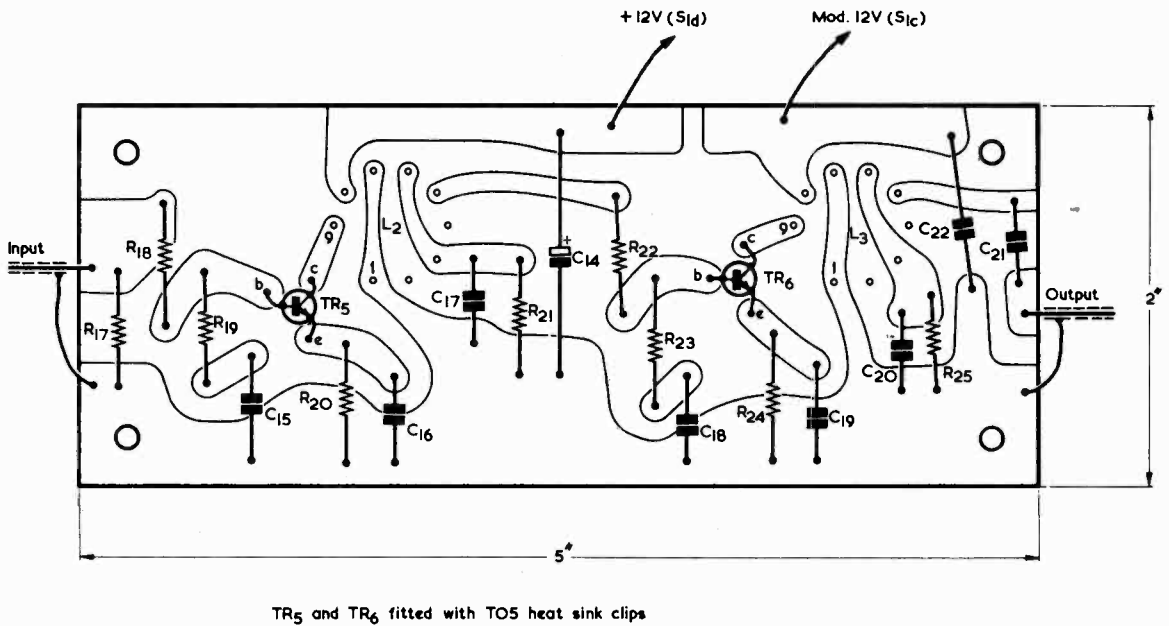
Component side of the printed circuit board for the doubler and driver section
